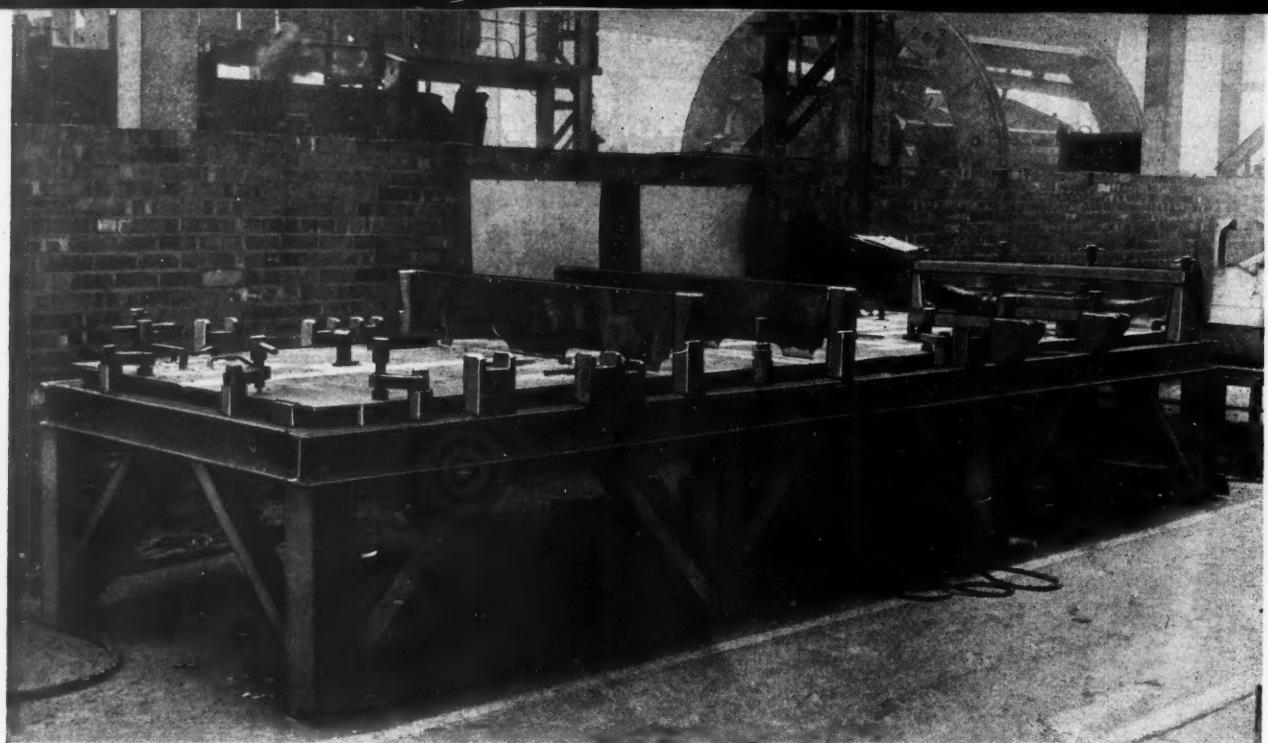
Floor supports and the engine cross-member are the principal parts added to the floor plate in this table type welding jig
